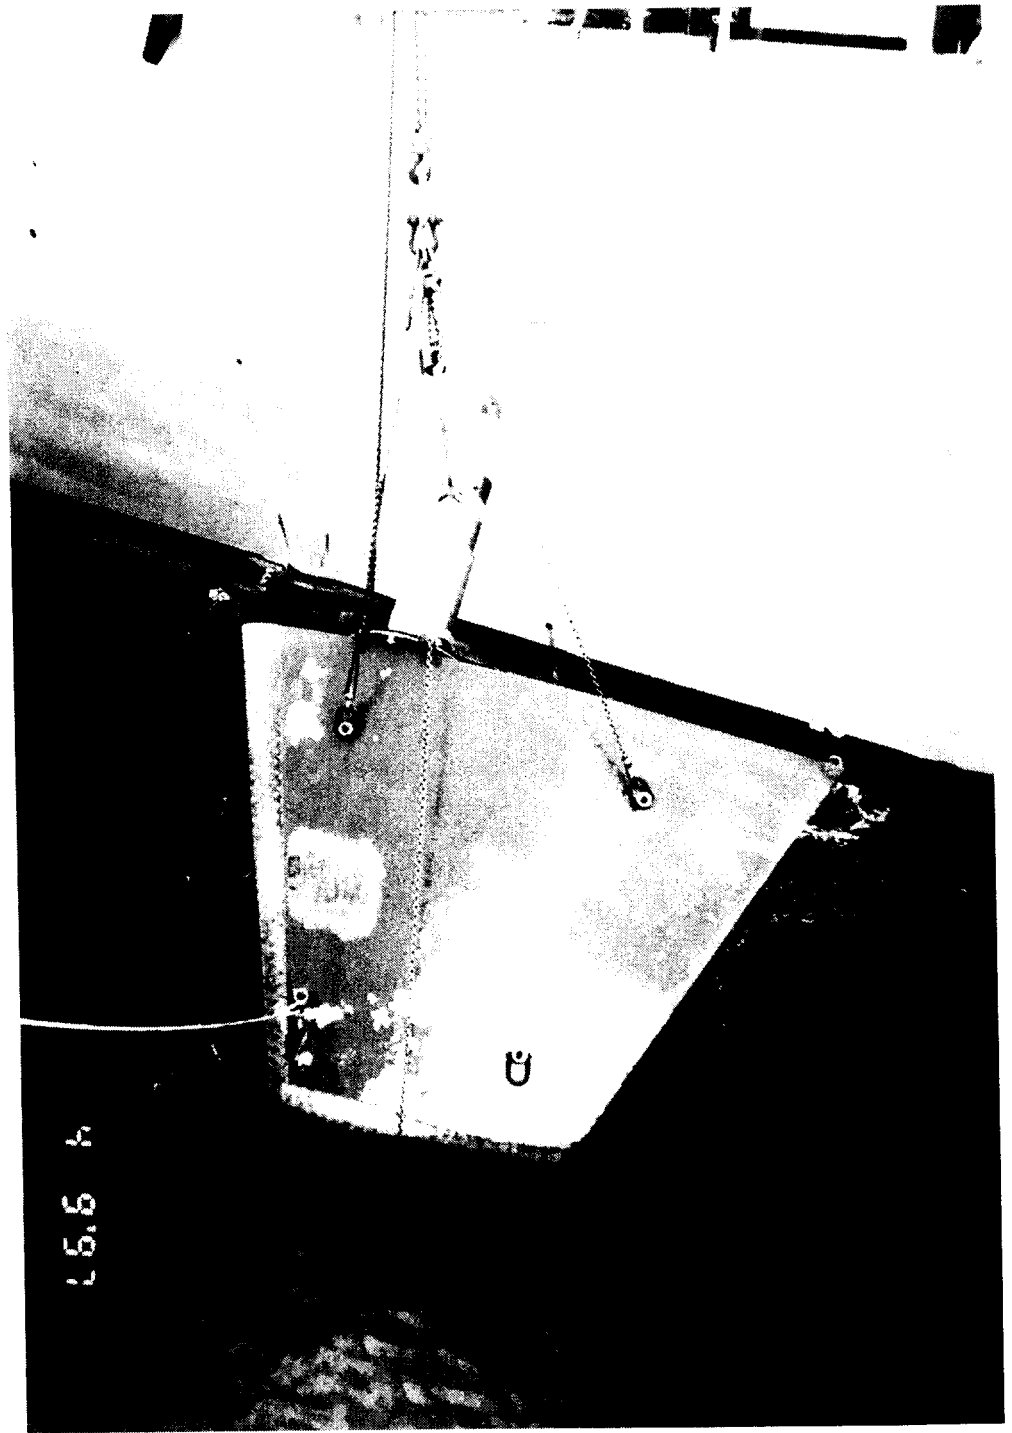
OLD FIN SHAFT SHOWING EXTERNAL RIGGING
